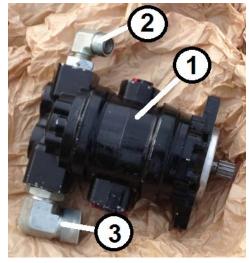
Hydraulic Pump Assembly Key 1 – Pump Key 2 – 90 deg, -12 Key 3 – 90 deg -20 to -16
